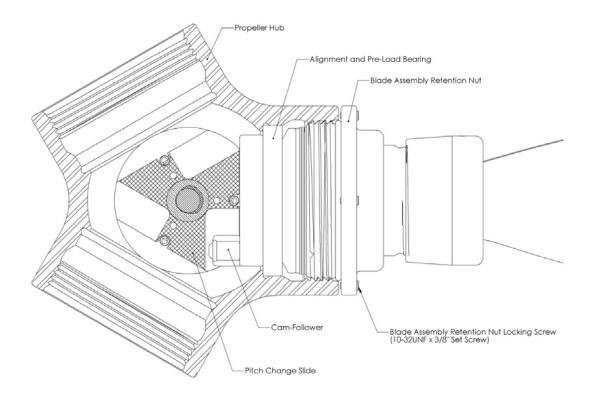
Blade Assembly Mounted into Propeller Hub (AP332 shown)
